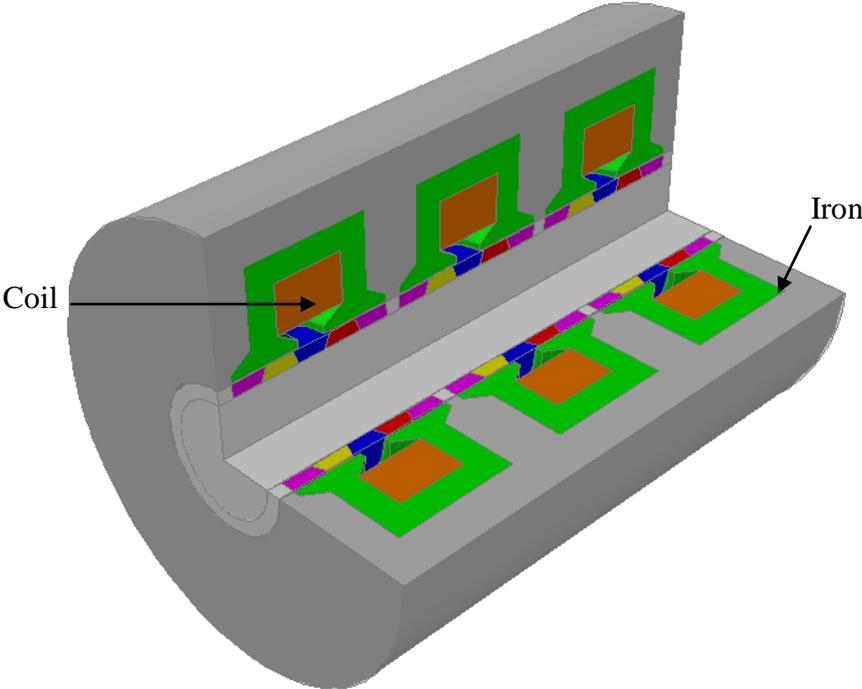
3D view of air-cored quasi-hallbach magnetised machine with trapezoidal magnet
